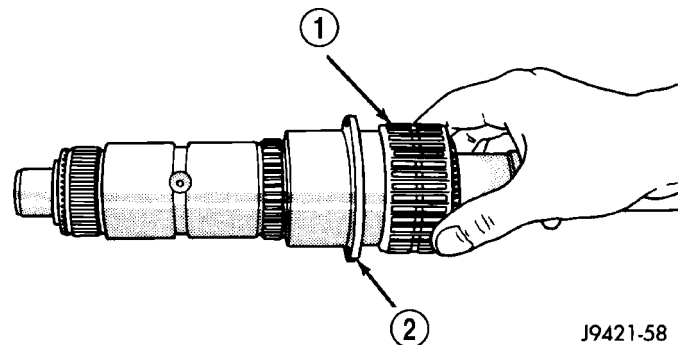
ASSEMBLED SYNCHRO COMPONENTS
